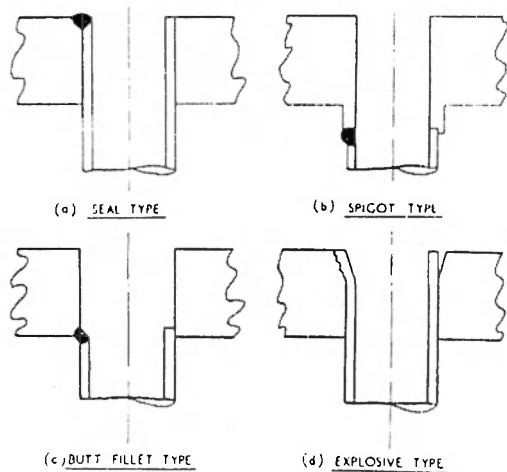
Principal types of tube-to-tube plate welded joints.
